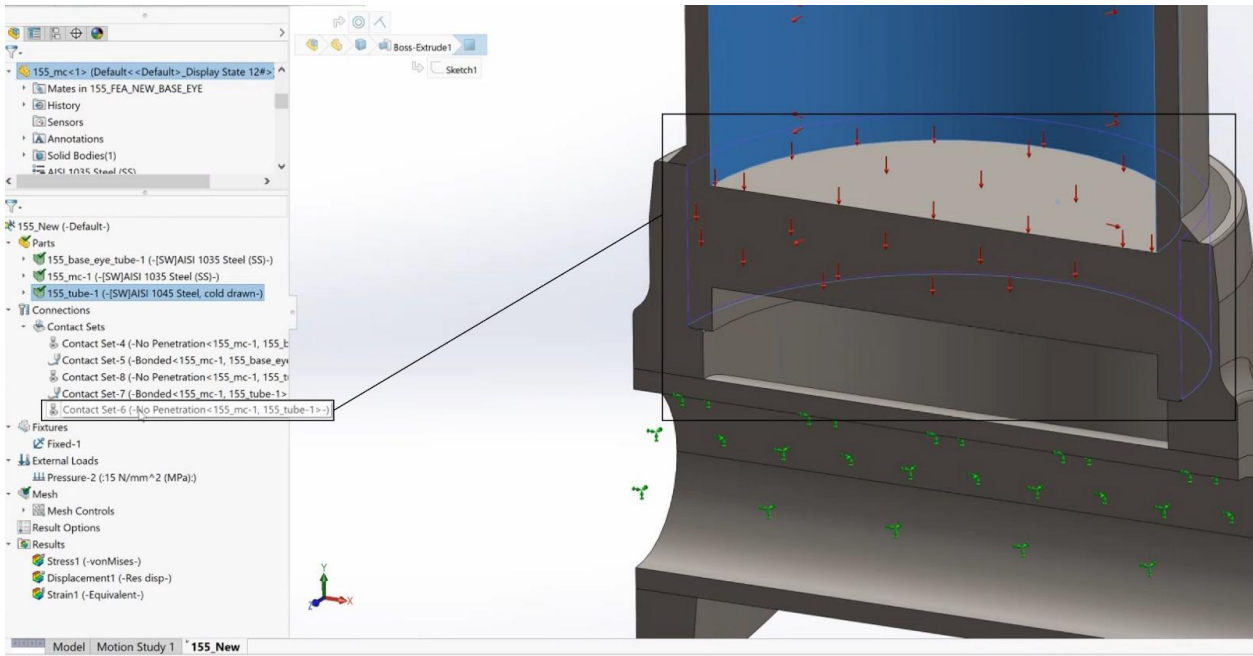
Contact type with no penetration between the inner surface of the base eye and the outer surface of the barrel
